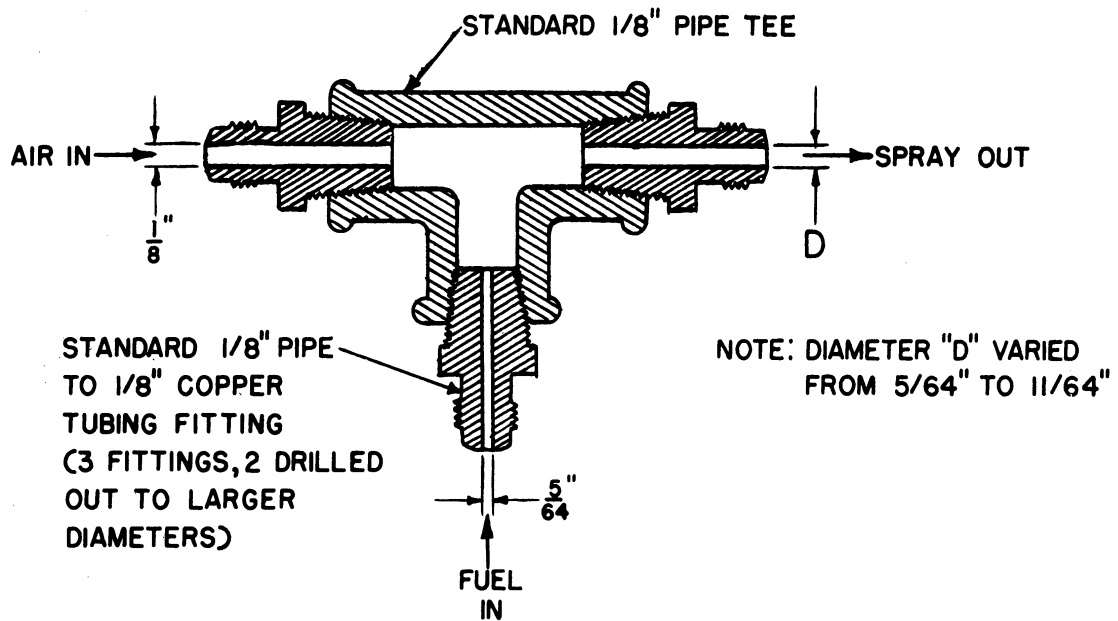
DIMENSIONS OF TEE NOZZLES USED IN 12 INCH BURNER.
